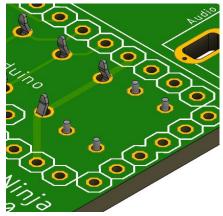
Back view of the VU Stick V1.2 PCB with shortened soldered resistor R1 and R2 pins.
